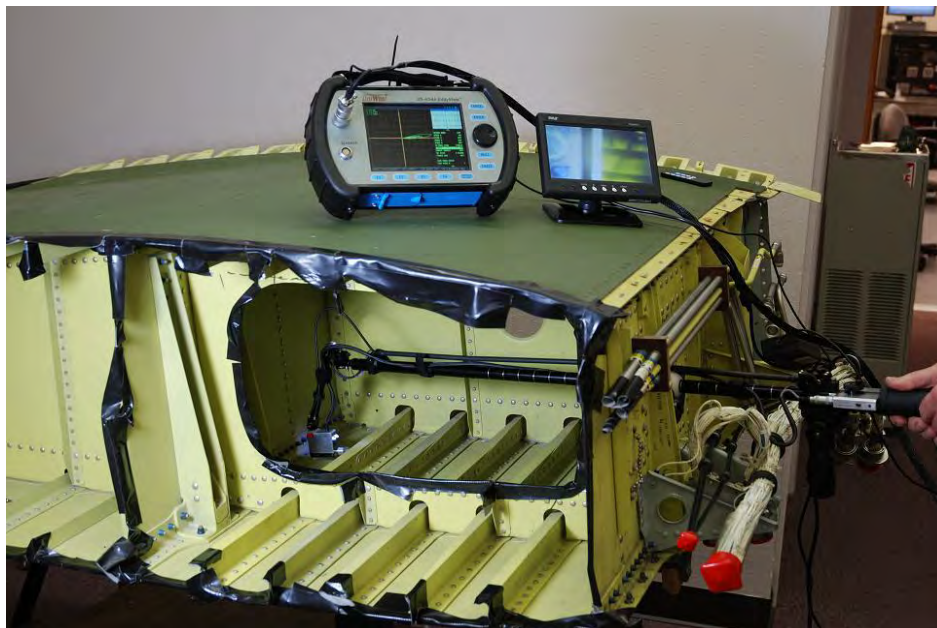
The SuNDE Tool is being evaluated for limited access HFEC inspection for cracks around fasteners in the A-10 wing section. (A single monitor with switchable cameras is being used here.)
